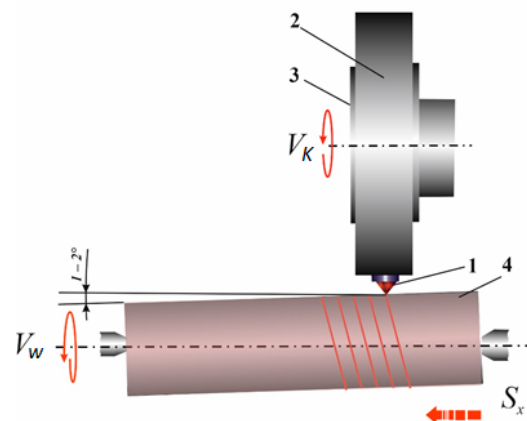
Scheme of cutting-scratching of a part with a diamond cone and an abrasive bar on a circular grinding machine.
